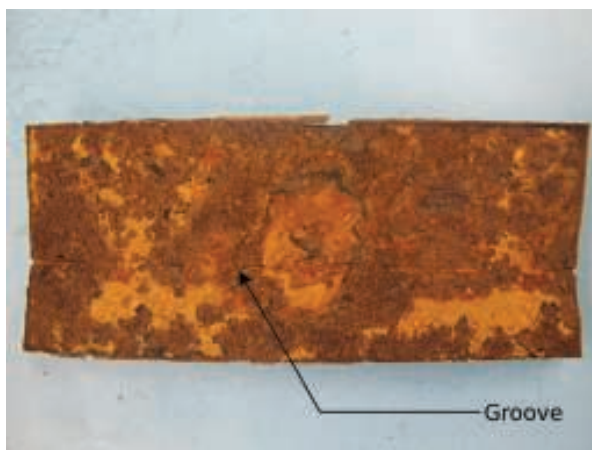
Stagnant water inside the sprinkler pipe caused grooving corrosion of the longitudinal weld seam
